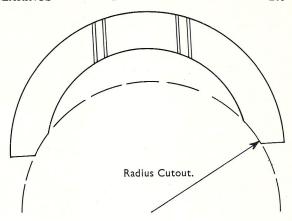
Illustration showing radius which is provided on some thrust washers for manufacturing reasons.
